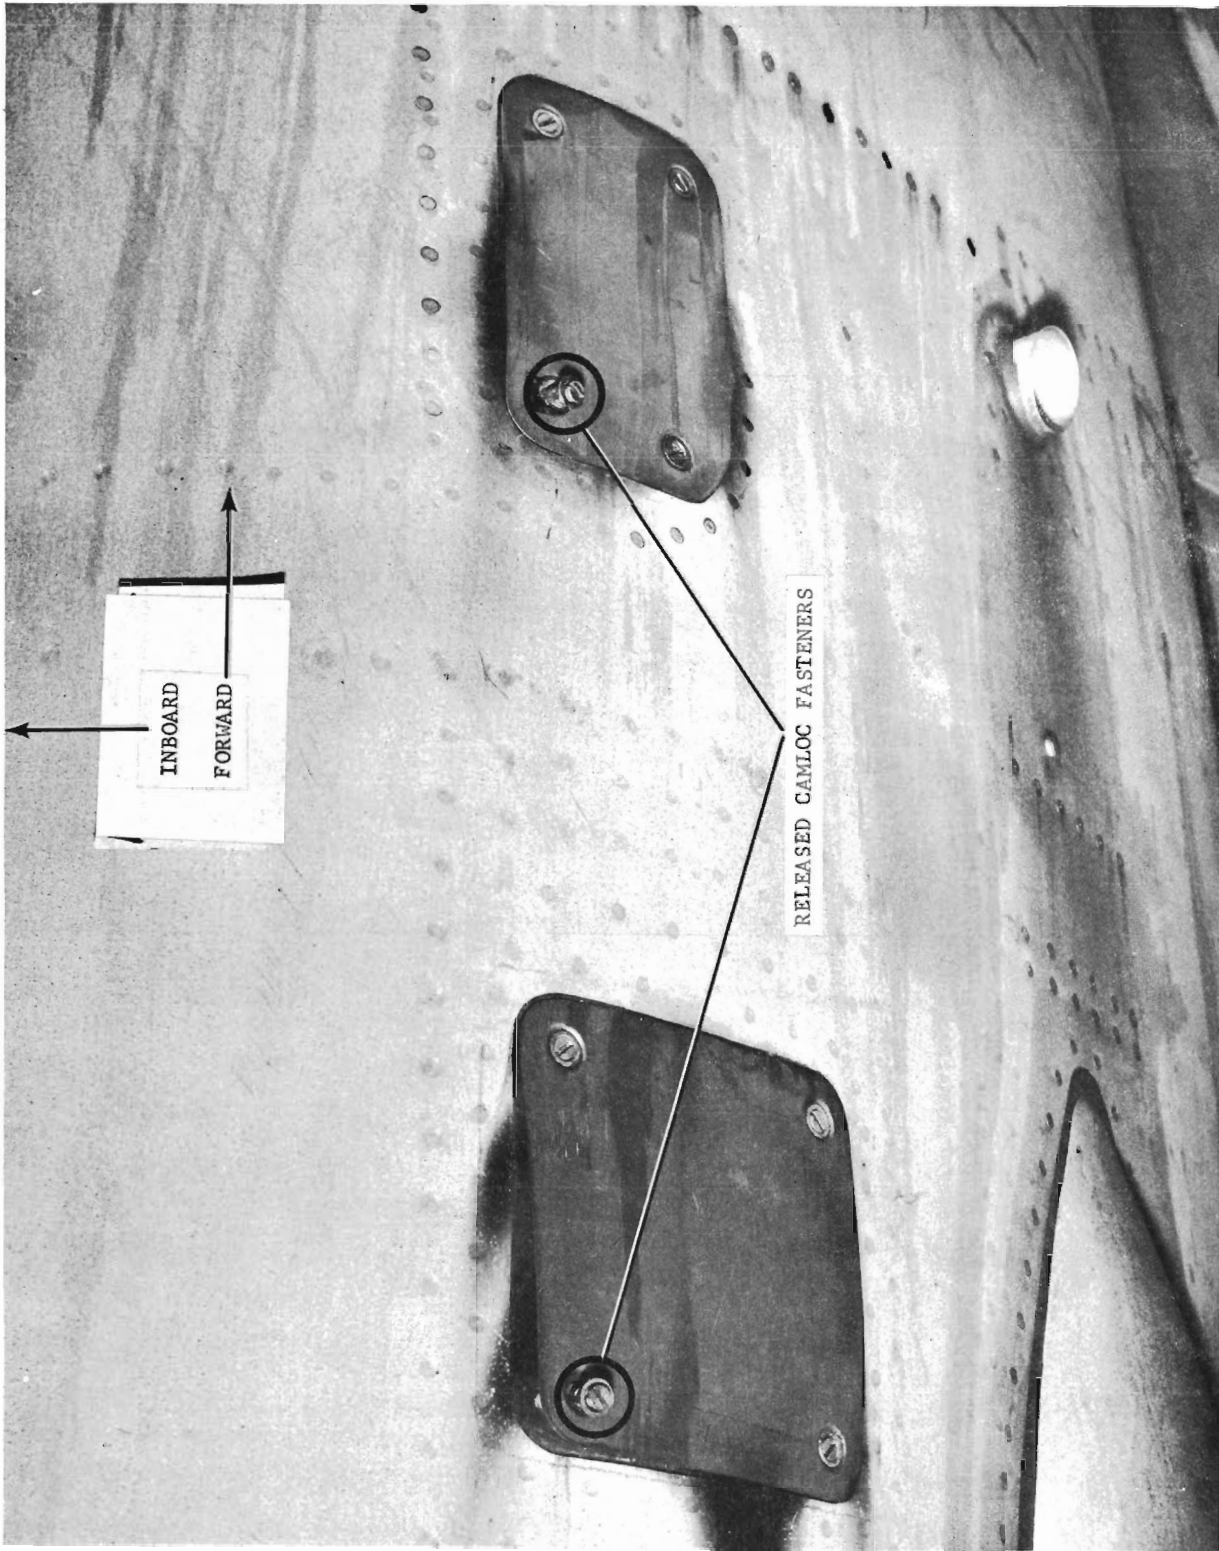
EXTERNAL VIEW OF DAMAGE IN INSPECTION PLATE AREA
